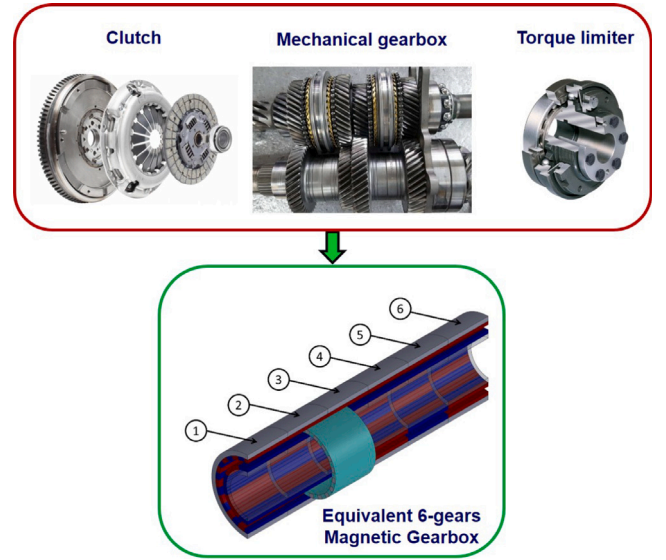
Driveline complexity reduction using a magnetic gearbox.
